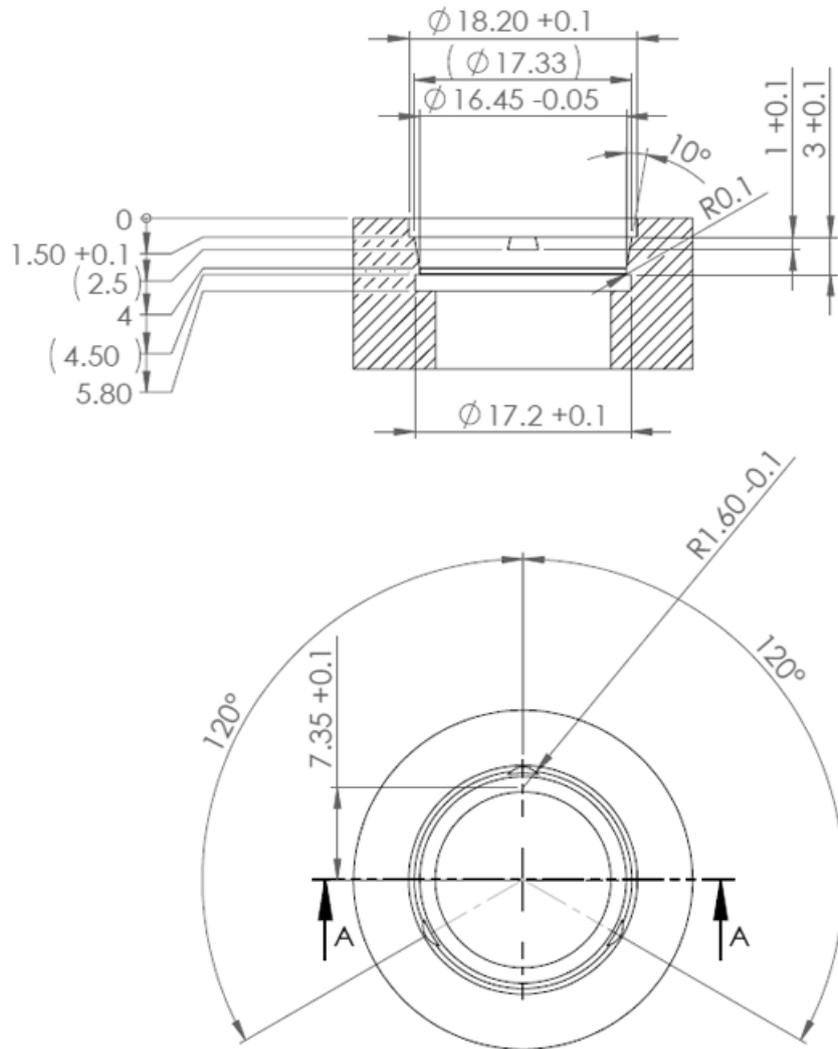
Dimension drawing: Workpiece drill hole for mounting the MDS D522 special version
